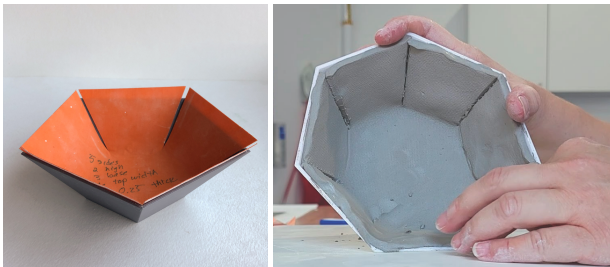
A 3D printed slump mold with its matching template. Clay being pressed into a mold.
